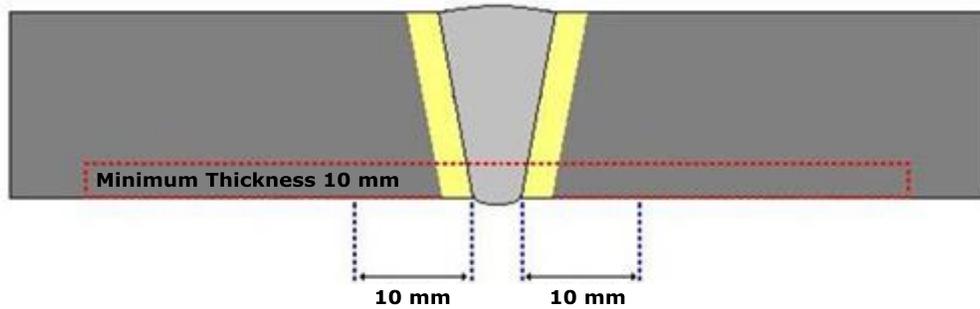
SSCC corrosion test specimen removal for girth weld joints.
